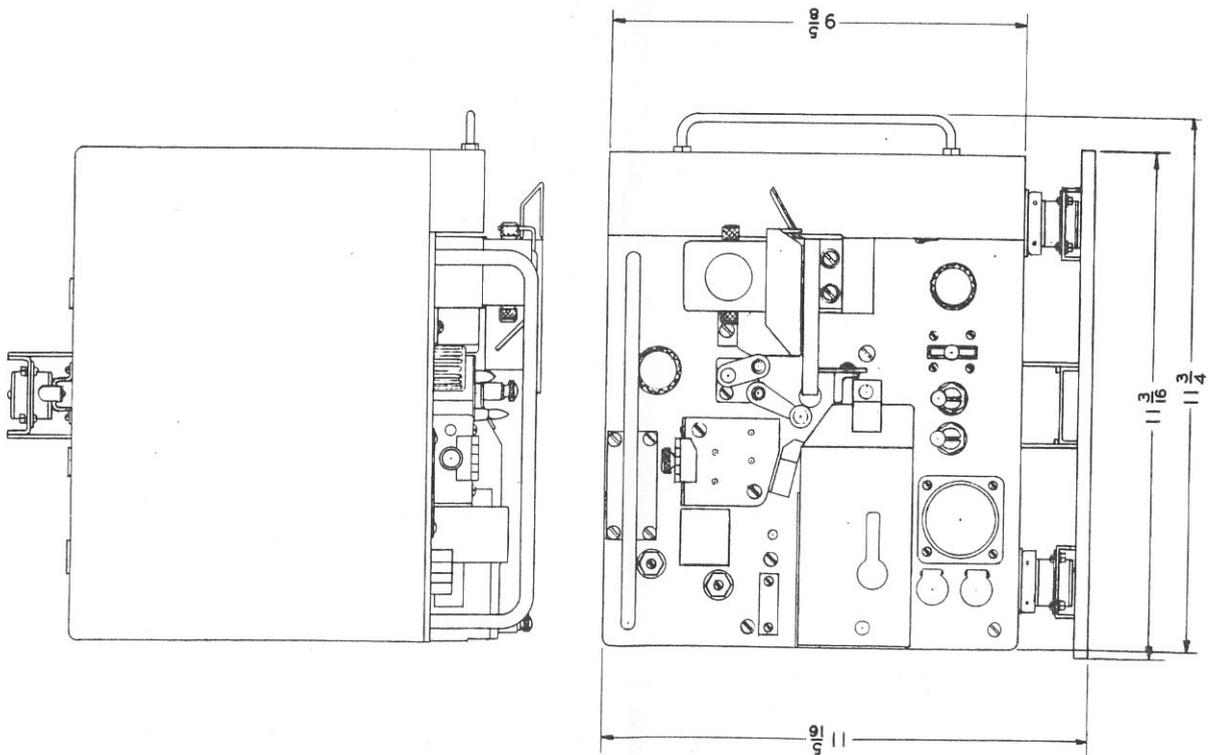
Recorder-Scanner BC-918-B and Mounting FT-328-B, outline drawing
